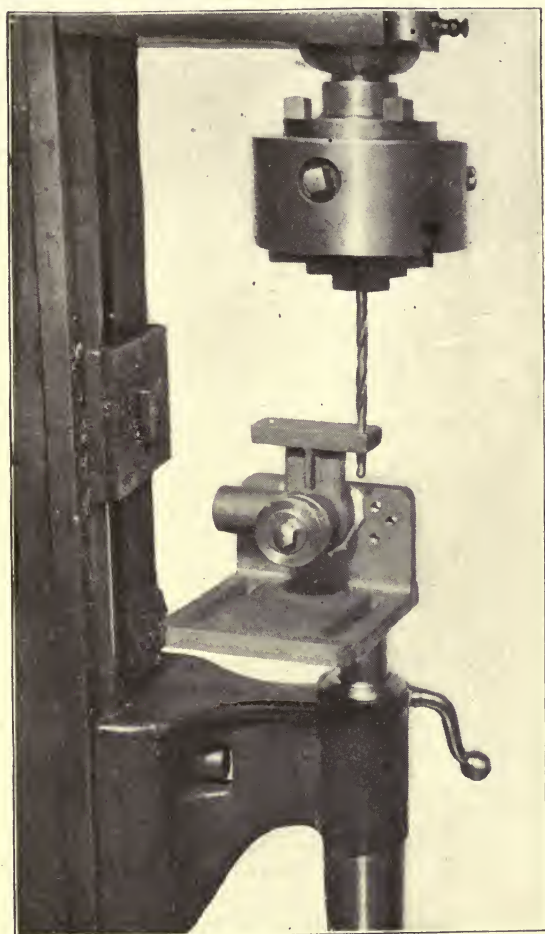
DRILLING BASE OF MAIN BEARING FOR CAP SCREWS.
